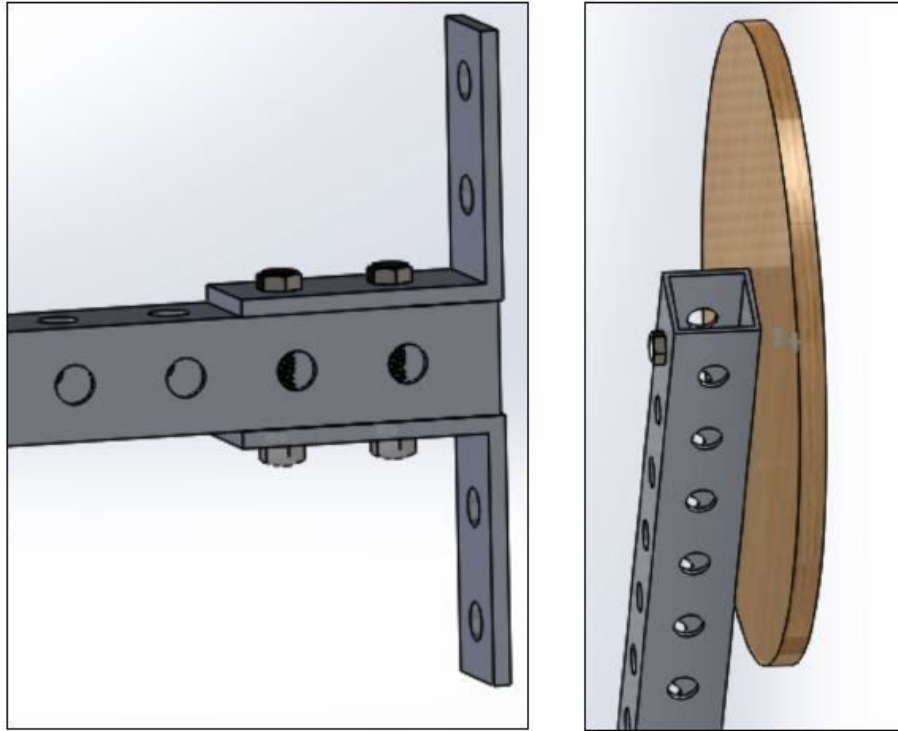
Model of Punching Bag and Rack Attachment Connectors.
